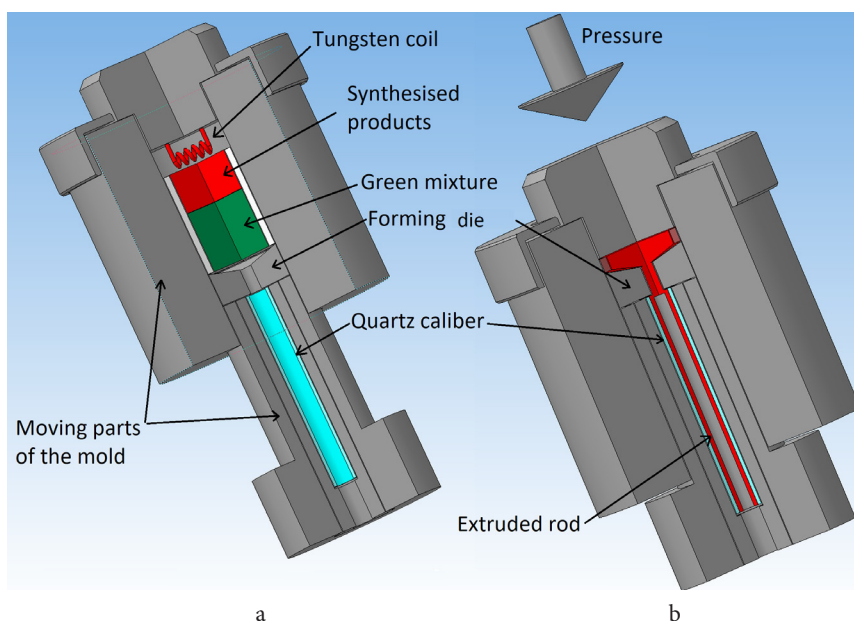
(Color online) Diagram of the SHS-extrusion process: SHS of the sample in the mold chamber (a), hollow rod in a quartz caliber after extrusion (b).
